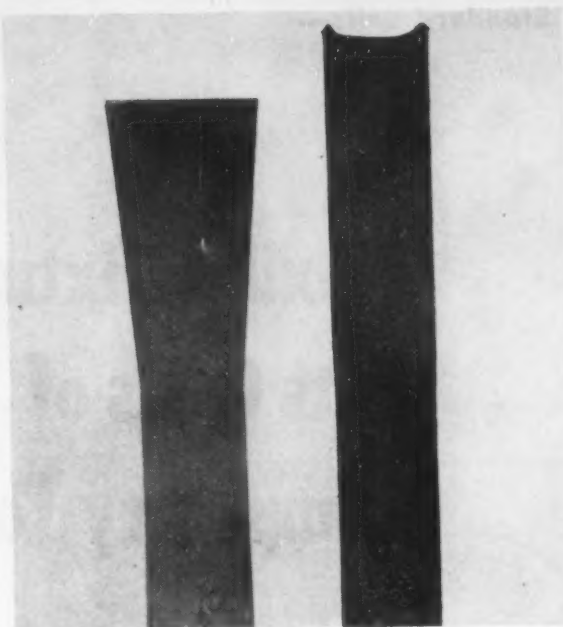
Wedge draw samples shown before and after testing in a special die.
